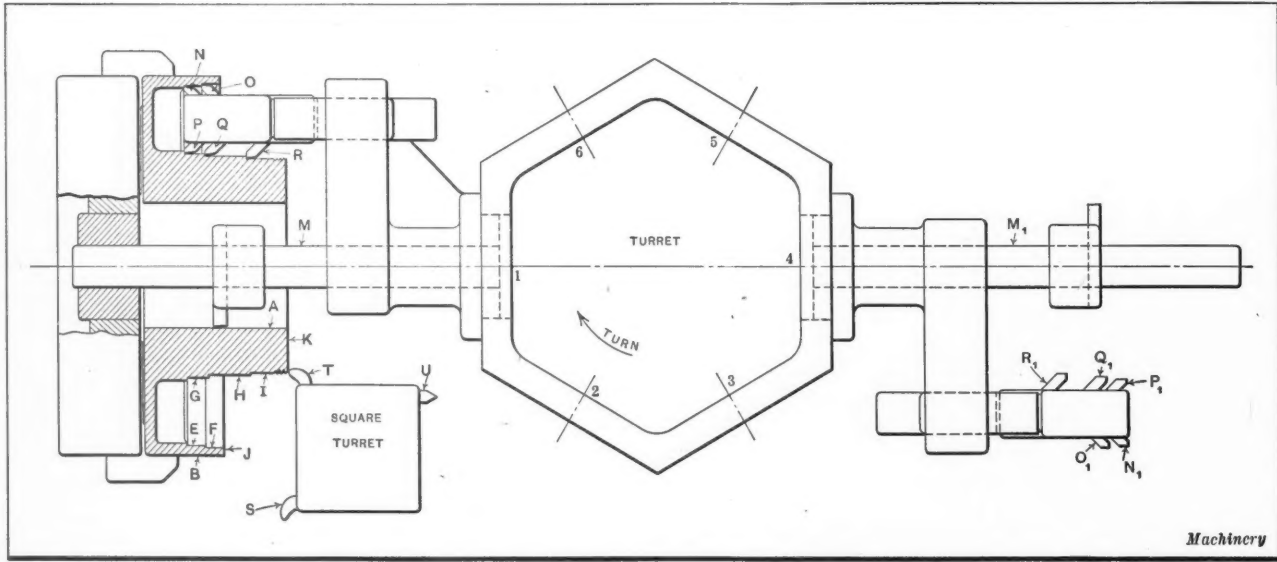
Lay-out of the Tools used in the Final Operation on the Chuck Body
